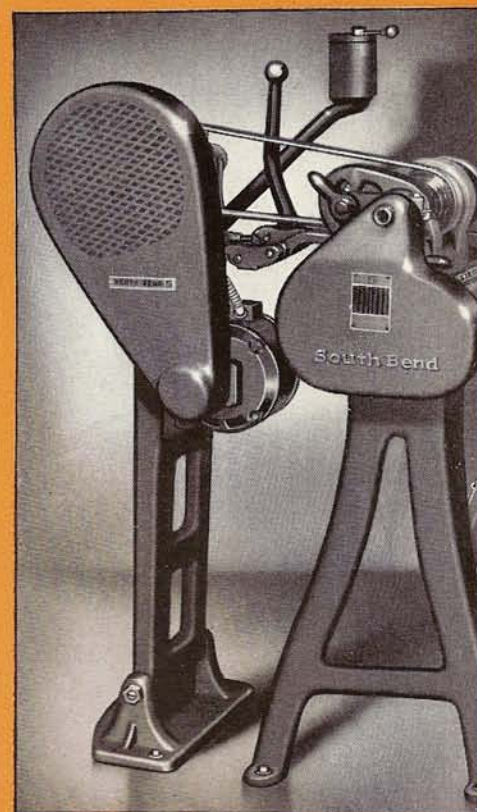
End View of Pedestal Motor Drive Showing Arrangement of Motor, Belt Adjustment, etc.
